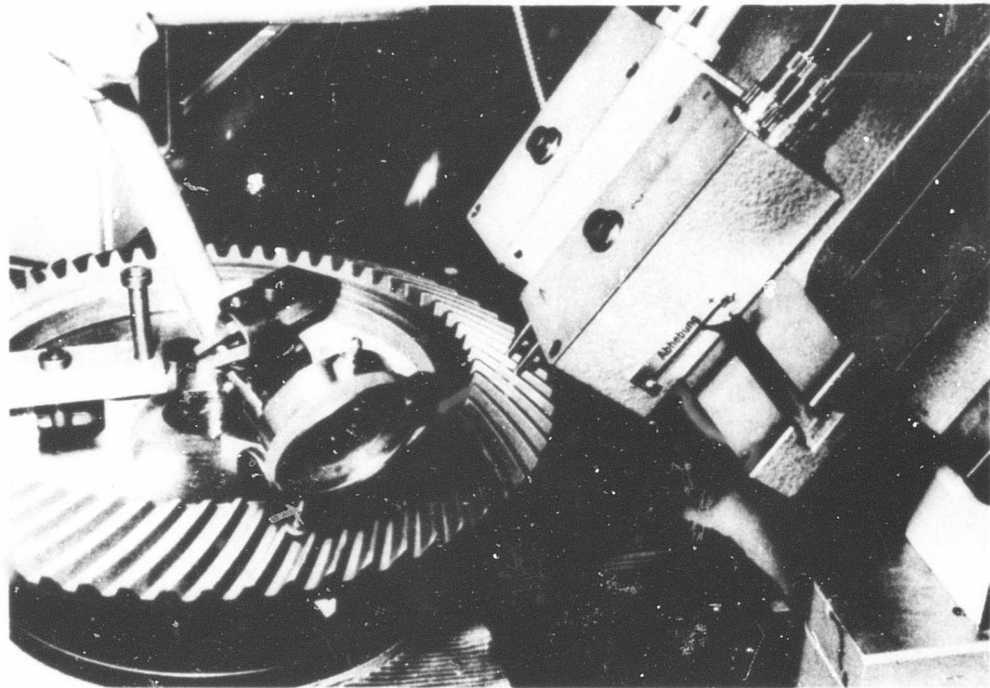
Measurement of Tooth Spacing on the Input Stage Spiral Bevel Gear Performed by the Hofler Gear Measuring Machine.
